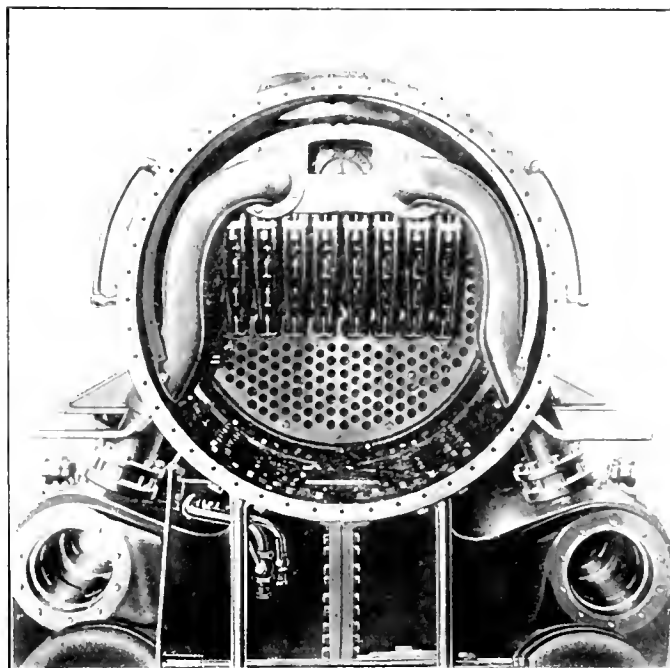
Front End Arrangement with a Fire Tube Superheater and Outside Steam Pipes.
